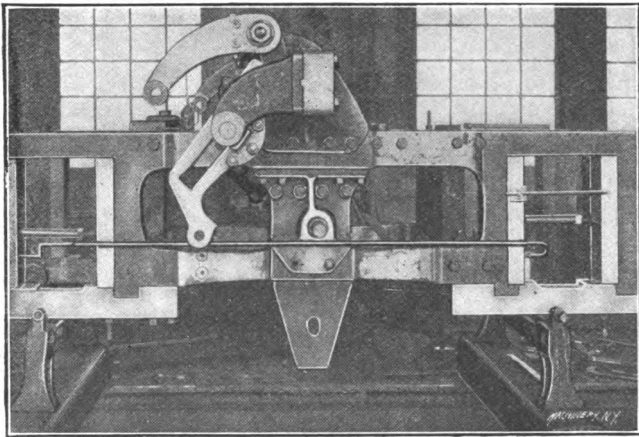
Testing the Pedestal Bearing Spacing and Marking off the Shoe and Wedge Fits
